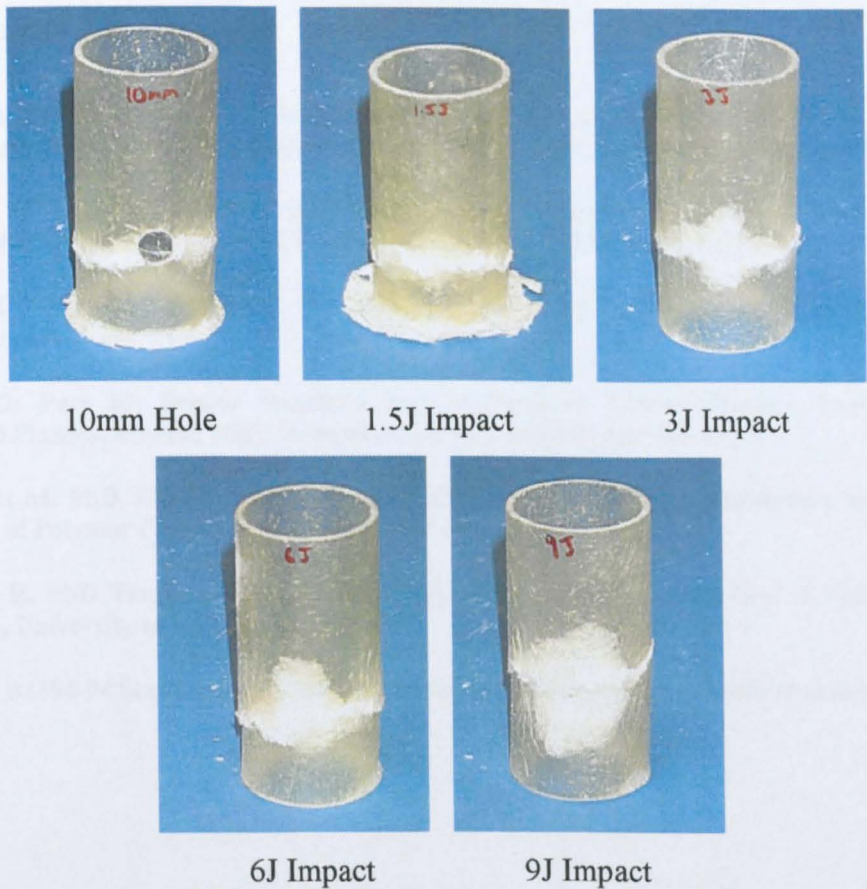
Part-tested small CoFRM/Norpol tubes used to take sections through fast fractures.
